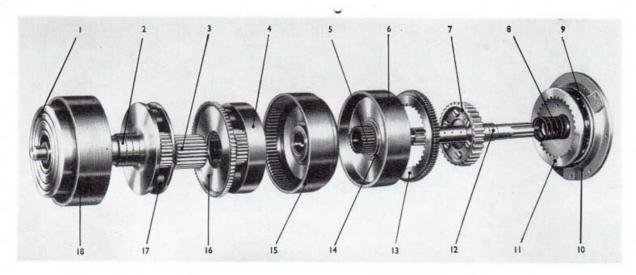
EXPLODED VIEW OF RUNNING GEAR (VIEWED FROM OUTPUT END).
